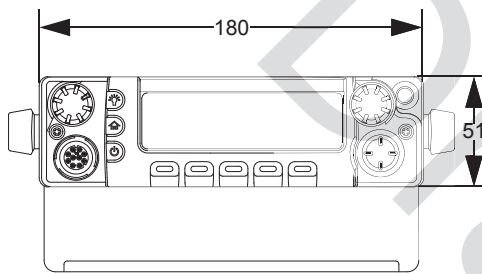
Front View of O5 Control Head with Remote Mount and Trunnion
